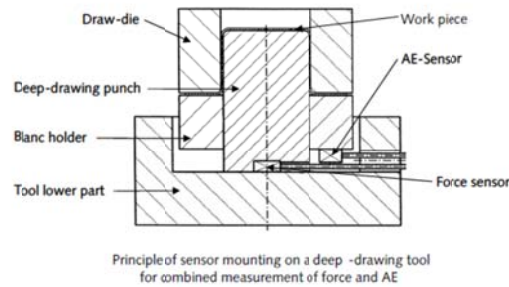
Schematic view on the sensor location for a force and AE sensor on a deep-drawing tool.
